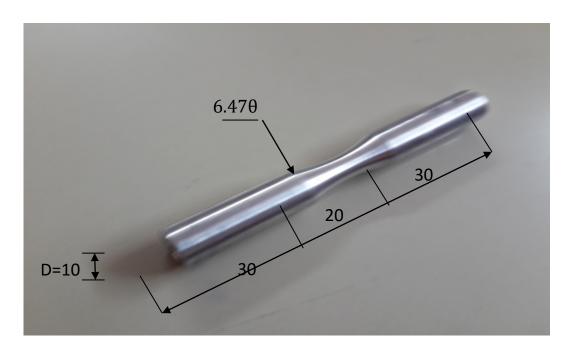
; Dimensions of fatigue test specimen according to DIN 50113.
